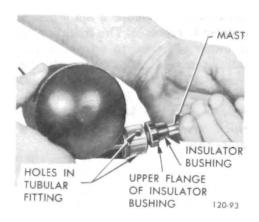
Removing or Installing Mast and Insulator Bushing
